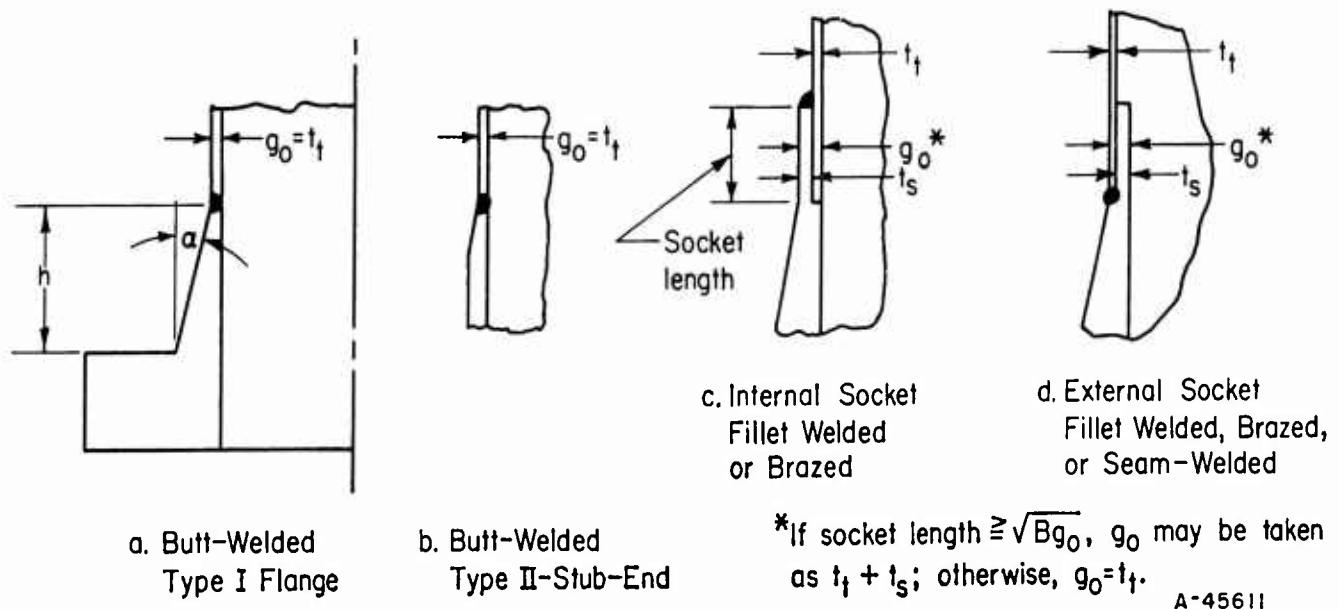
FLANGE OR STUB END-TO-TUBE JOINING METHODS
